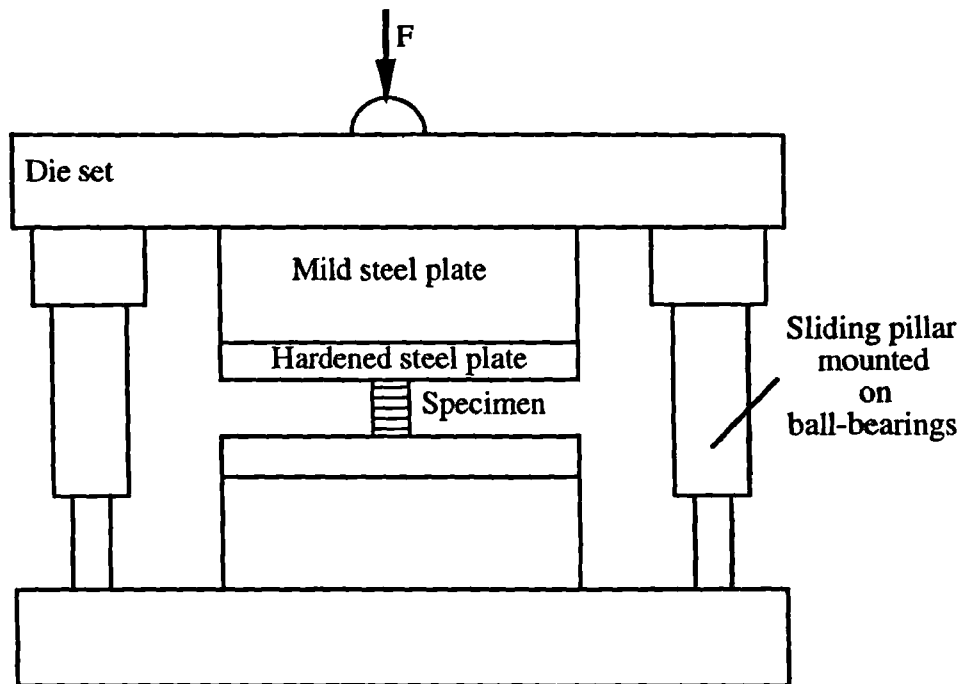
Diagram of the compressive test fixture (not to scale)
